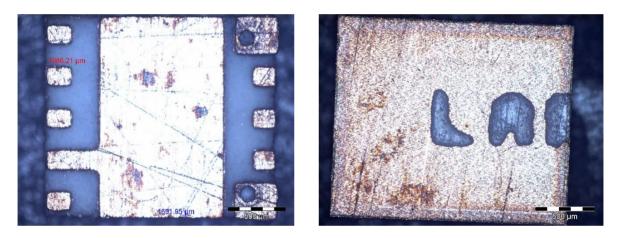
Top and Bottom view of "LAR" fabricated standard
